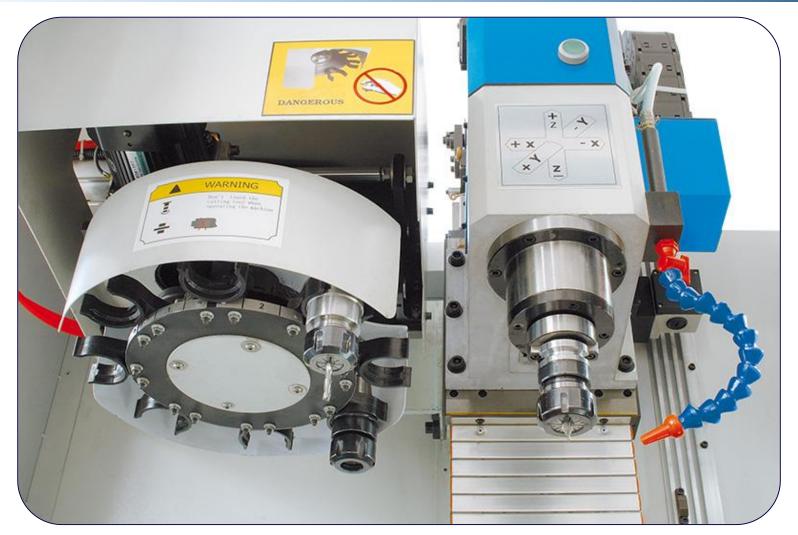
8-station tool changer on a horizontal machining center
